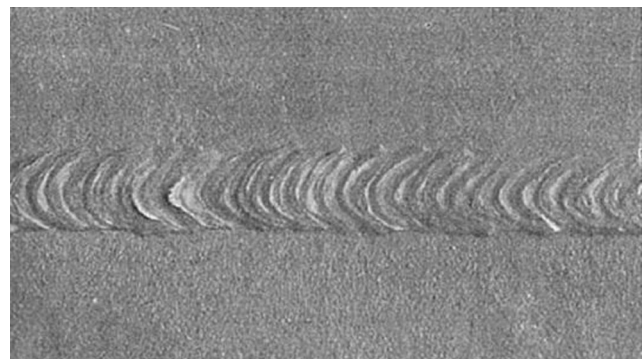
An experienced observer recognises from the simple aspect of this weld that it lacks penetration: protrusion of the added metal, visibly unconnected with the plates: too fast work or use of a filler wire with a too large diameter
